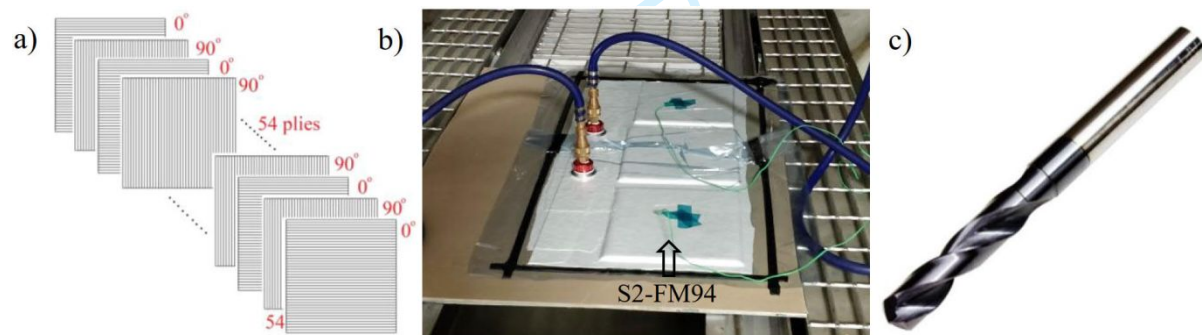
(a) Fibre orientation system of S2/FM94 glass fibre composite workpiece (b) Manufacturing the workpiece in the autoclave (c) Cutting tool used in the study
